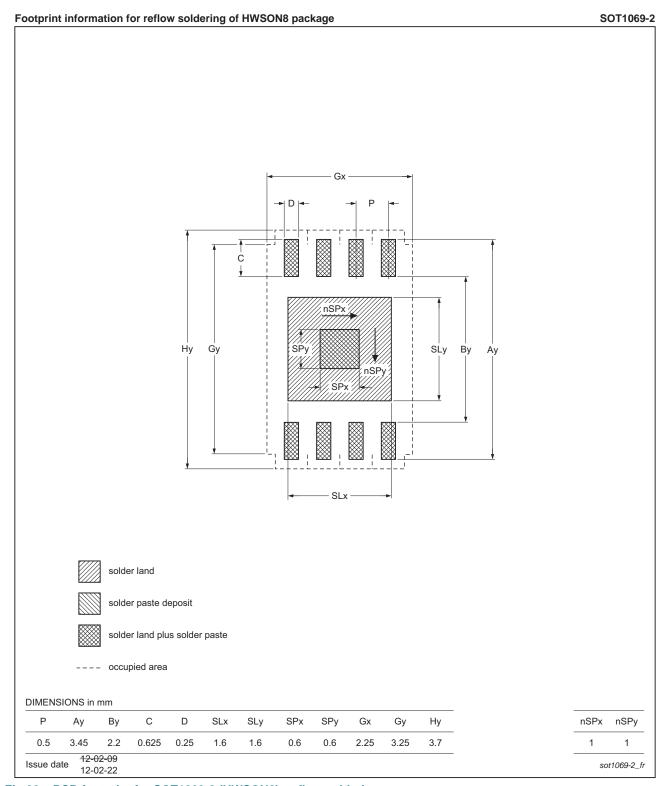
PCB footprint for SOT1069-2 (HWSON8); reflow soldering
